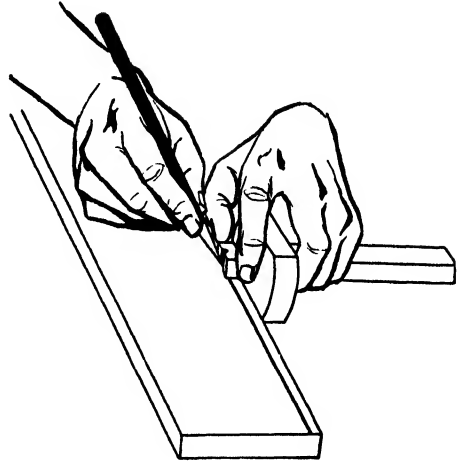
A good way to mark a chamfer. Hold the pencil point in a small notch filed in the end of the beam of a marking gage.
